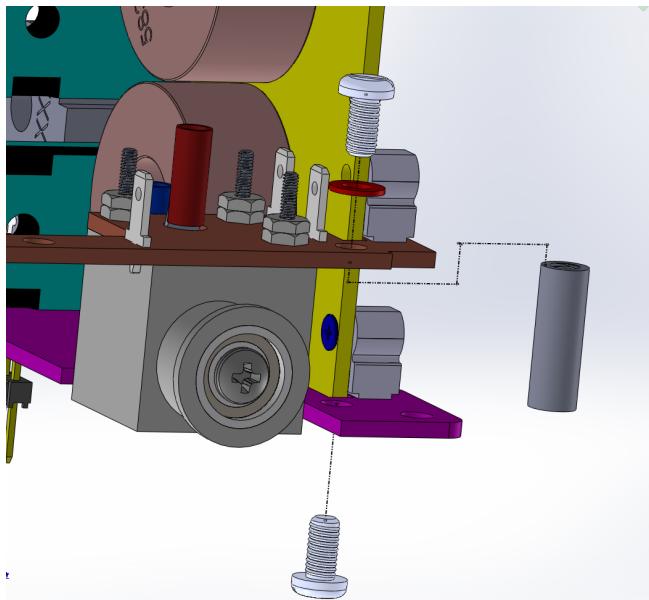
On BPR, slide in a 14 mm Spacer between the Bottom Board and B2 between their respective horizontal holes. Tighten a M3 (FH) Spacer Screw into the bottom of the Spacer. Use a M3 Belleville Spring Lock Washer and a M3 (FH) Spacer Screw for the top connection into the Spacer.
